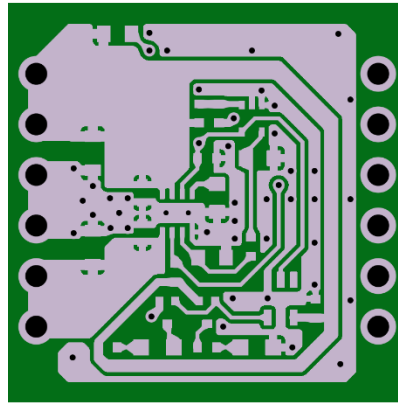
shows the PCB pattern diagram of the module board, and Fig. 3.2 shows the pattern diagram of the base board.
